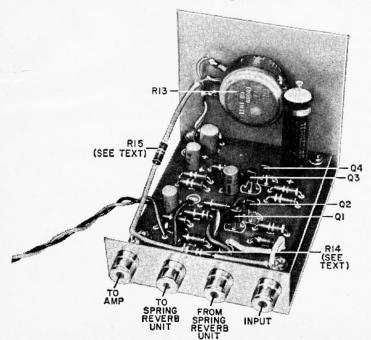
The finished board can be mounted on a metal chassis with the external connections completed as shown here. Short spacers isolate board from chassis.
